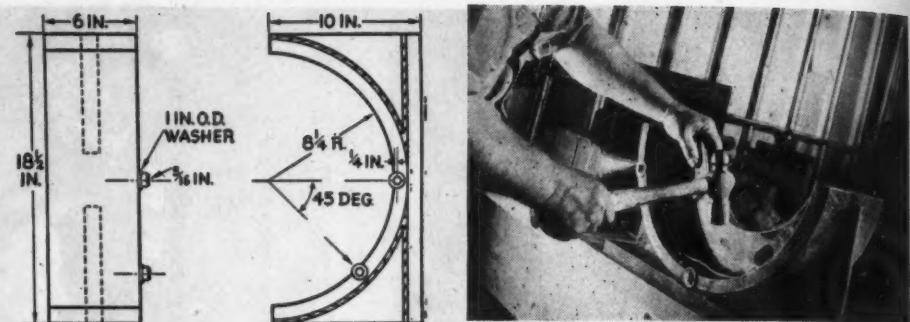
Left. Drawing of the special anvil developed in the shops for checking and straightening brake shoes. Right. Mechanic using the jig
